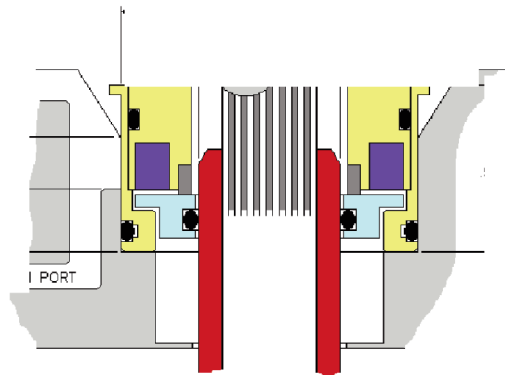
New Upper Magnetic Gearbox Oil Seal.
